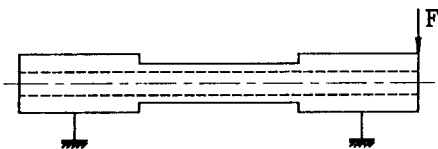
Static Bending Curve of Spindle with Cutting Force on Workpiece
